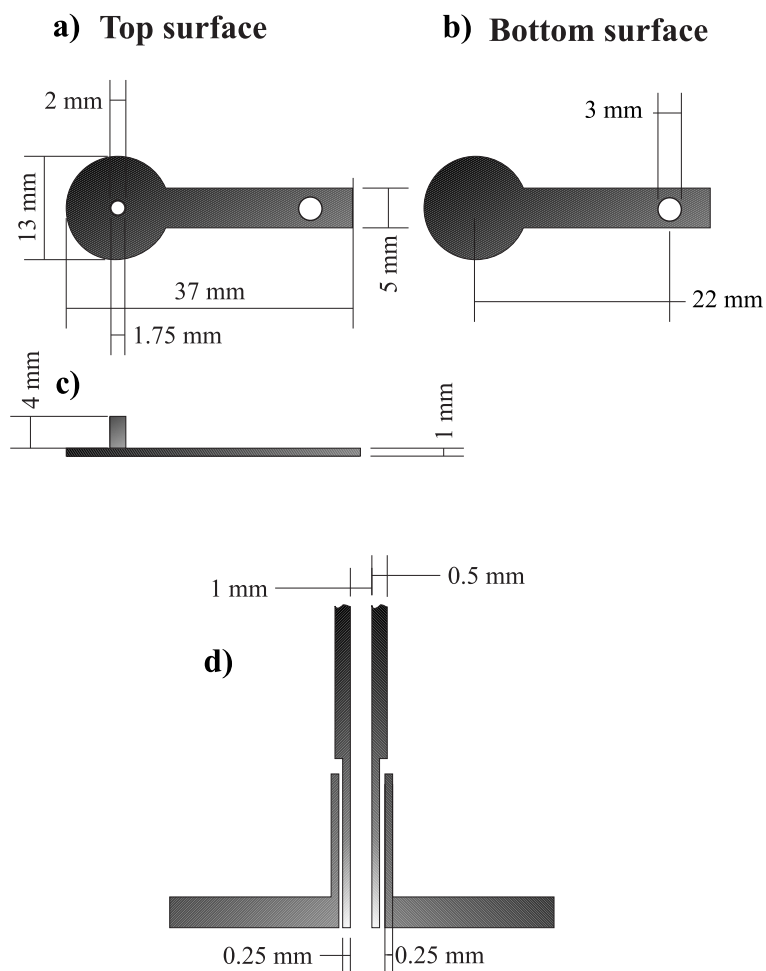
Design of the experimental NMR cell with fill line. a) Top view of the top surface. b) Top view of the bottom surface. c) Side view of the top surface. d) Longitudinal section of top surface showing assembly with thick silver tube
